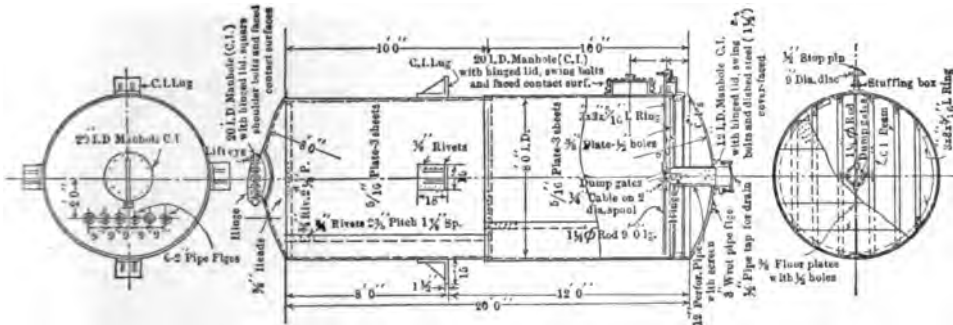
Details of a lubricating oil filter 8 feet in diameter by 20 feet in the shell.
